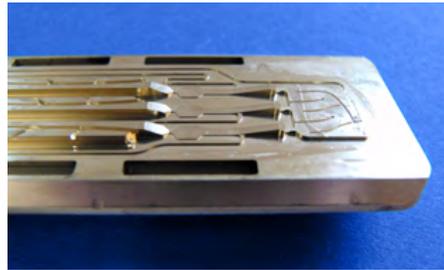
Mold insert realised using ultraprecision mechanical machining
